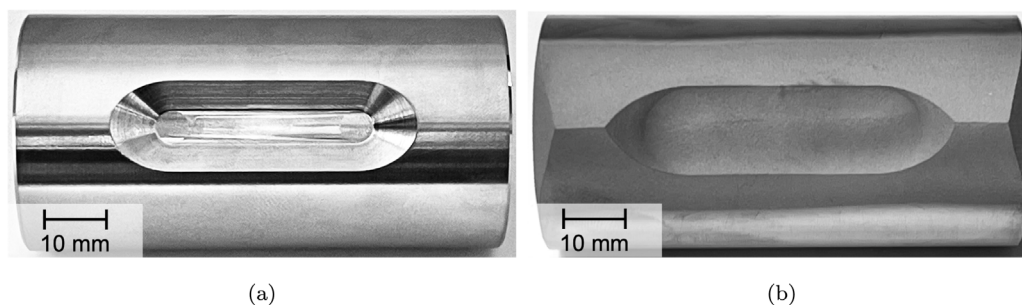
Photographs showing the cylindrical specimens before CGS (a) and in the as-sprayed condition for Parameter I (b), showing overspray around the filled repair cavity.
